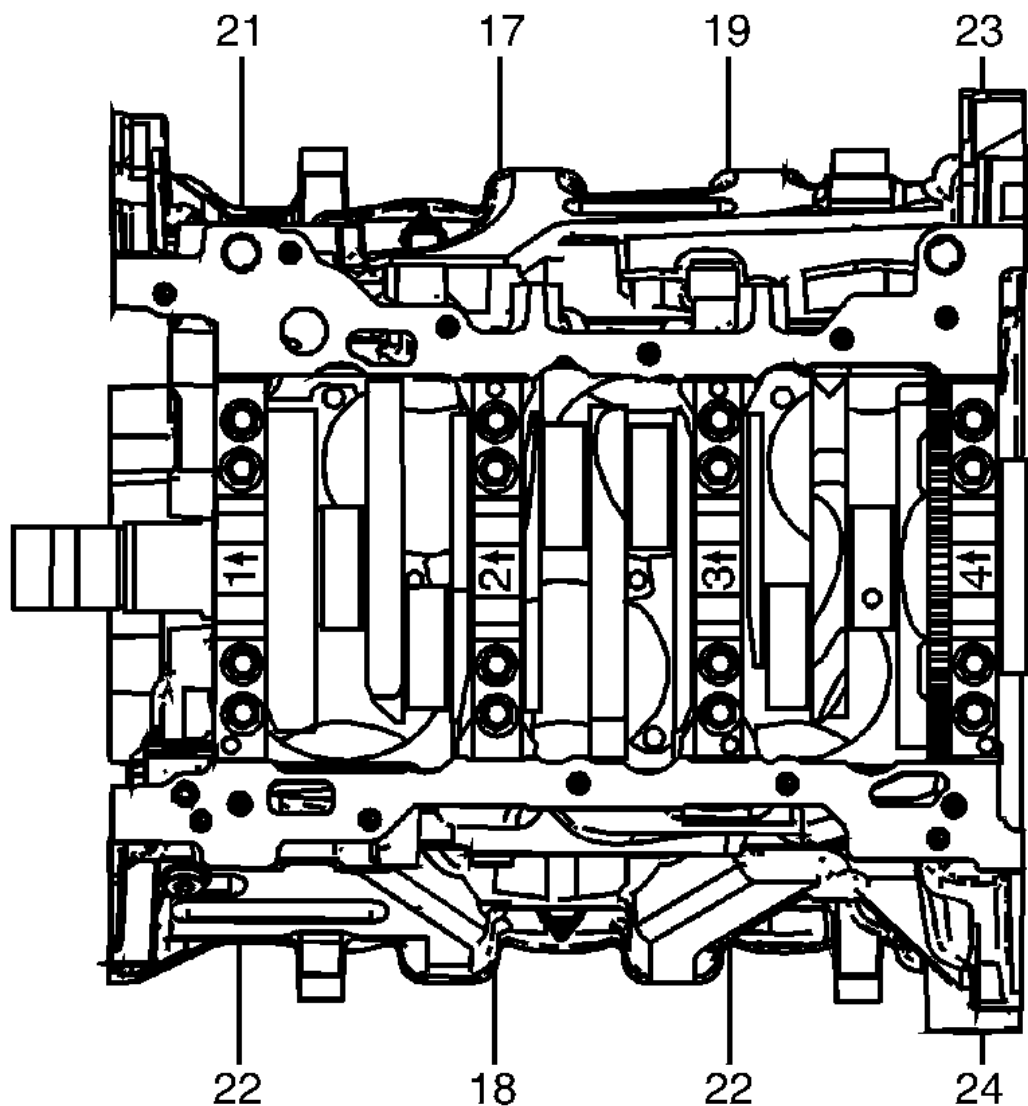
Identifying Outboard Crankshaft Bearing Cap To Cylinder Block Retaining Bolt Tightening Sequence
